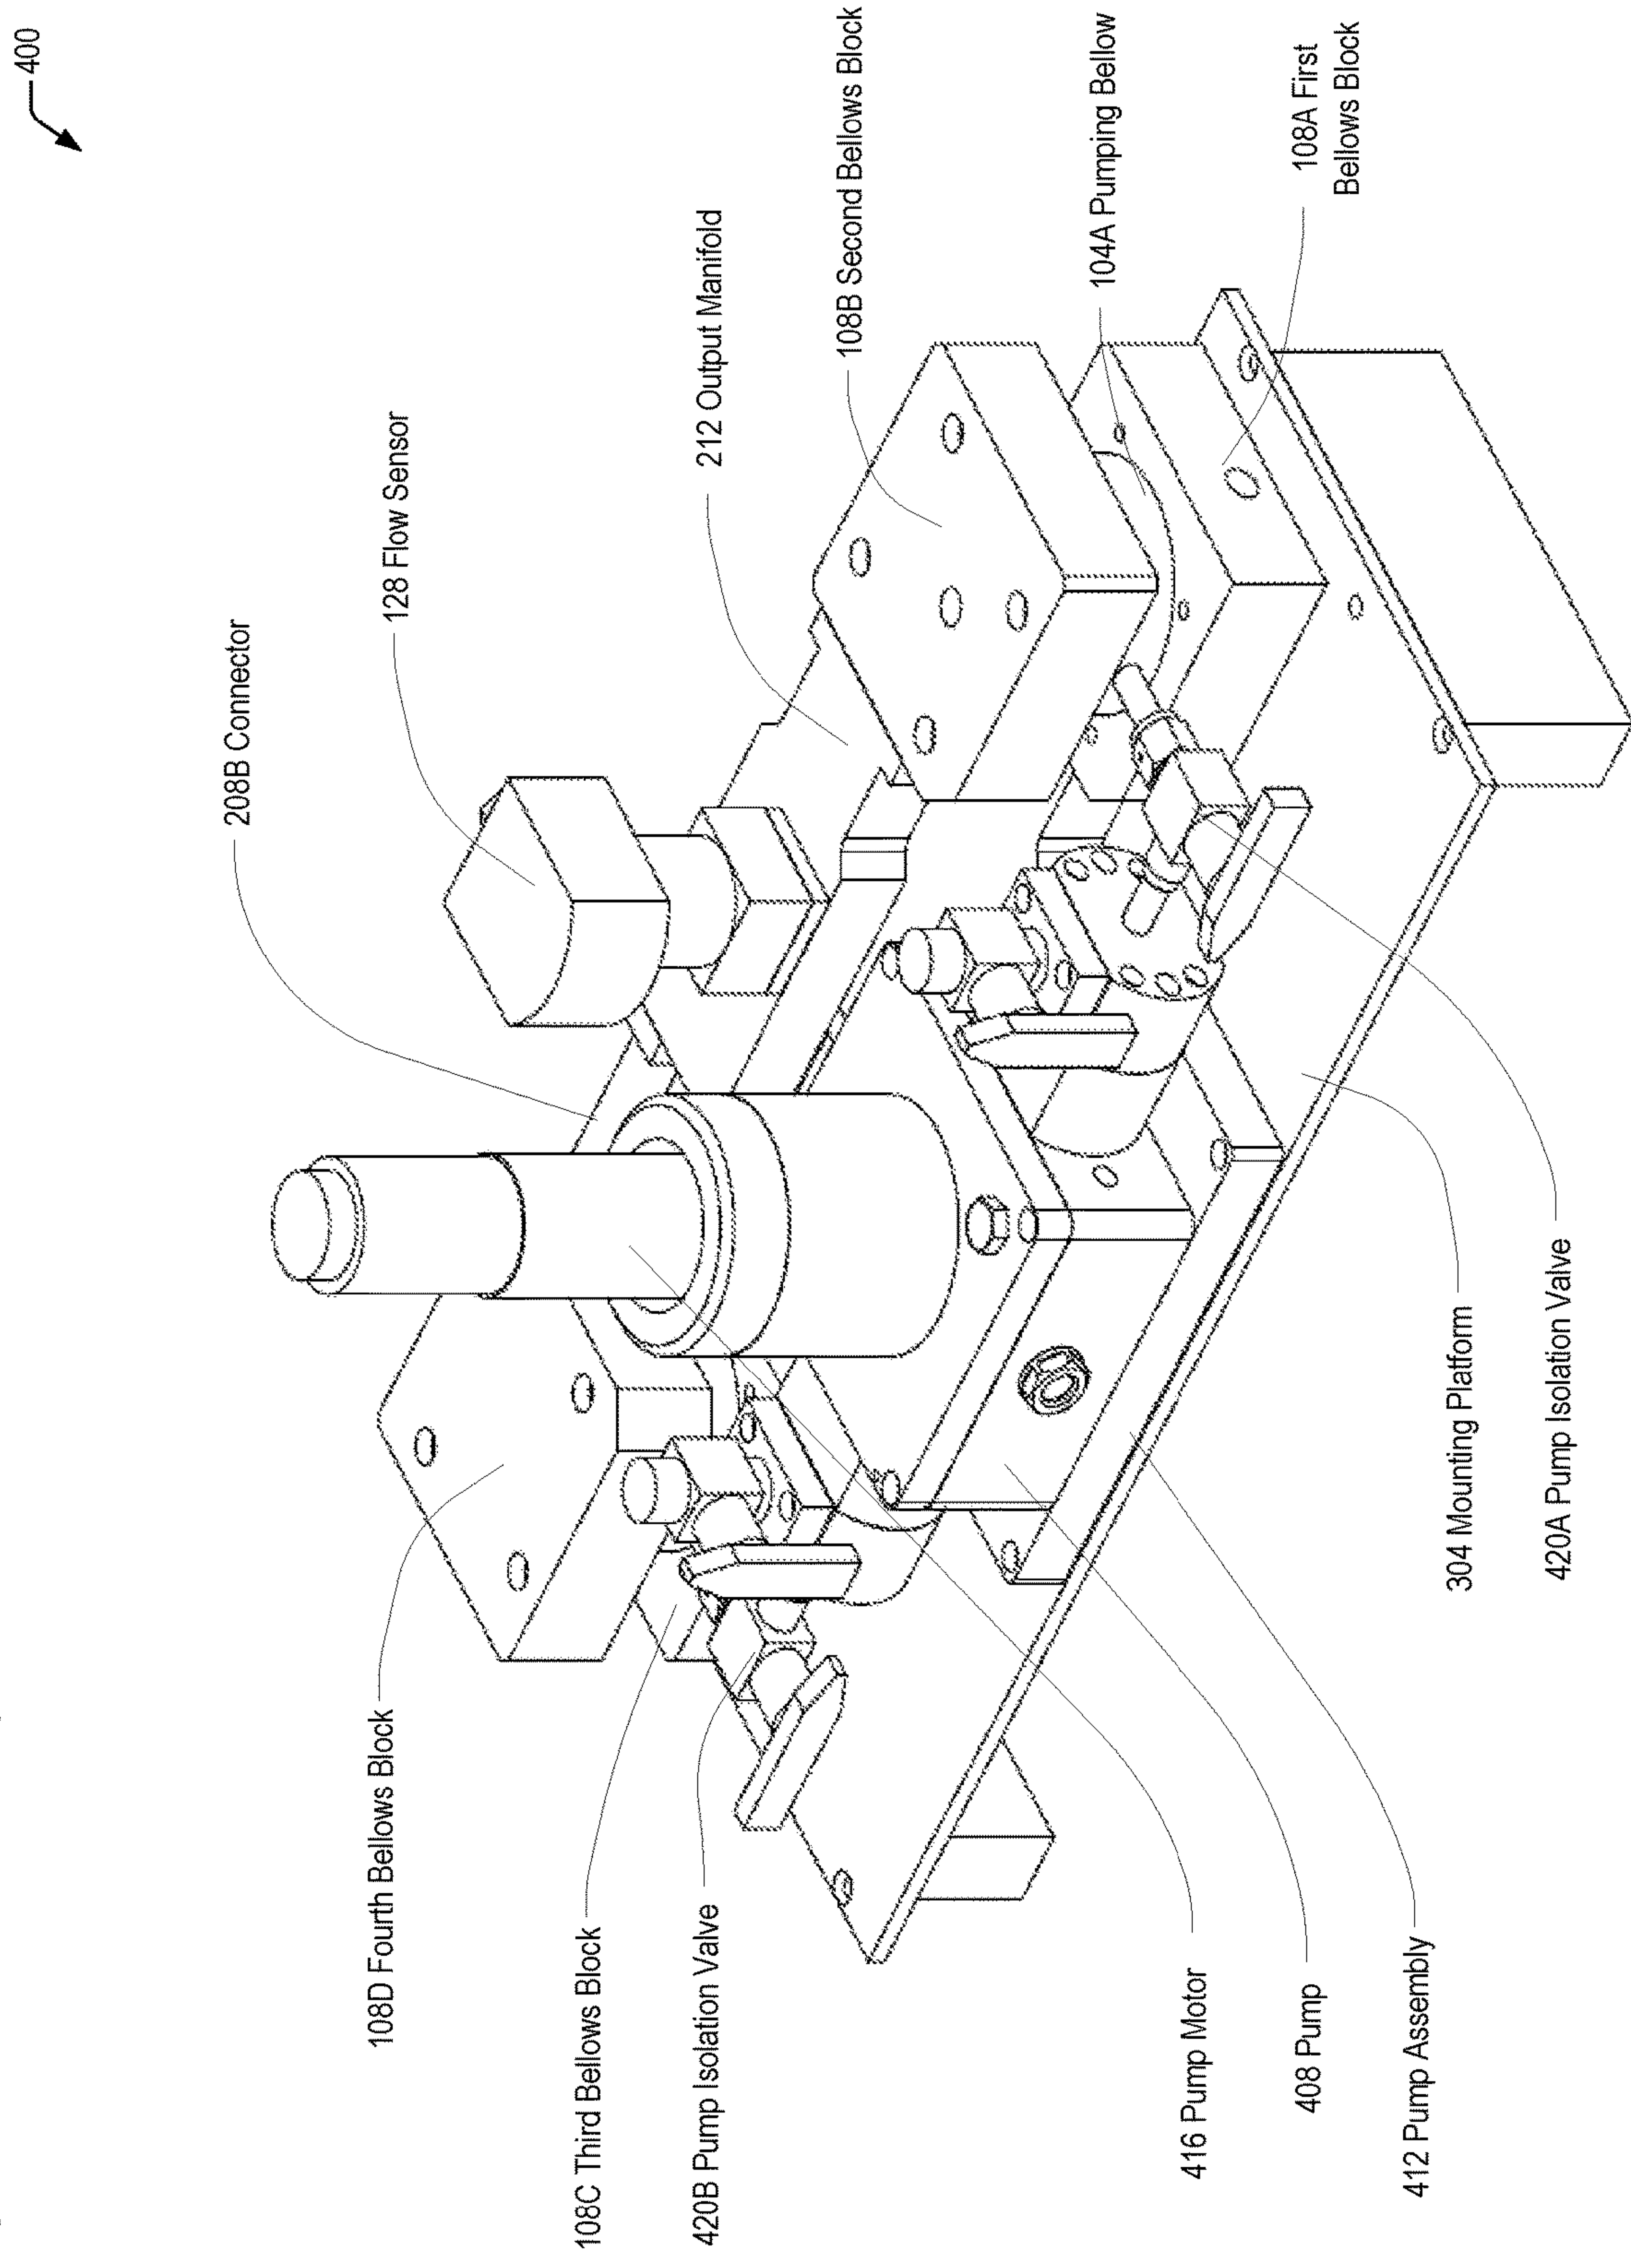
B Fluid Transfer System With Separated Pump Assembly of Second Embodiment
